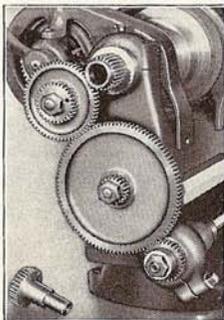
Gears Arranged to Cut Right Hand Screw Threads.
